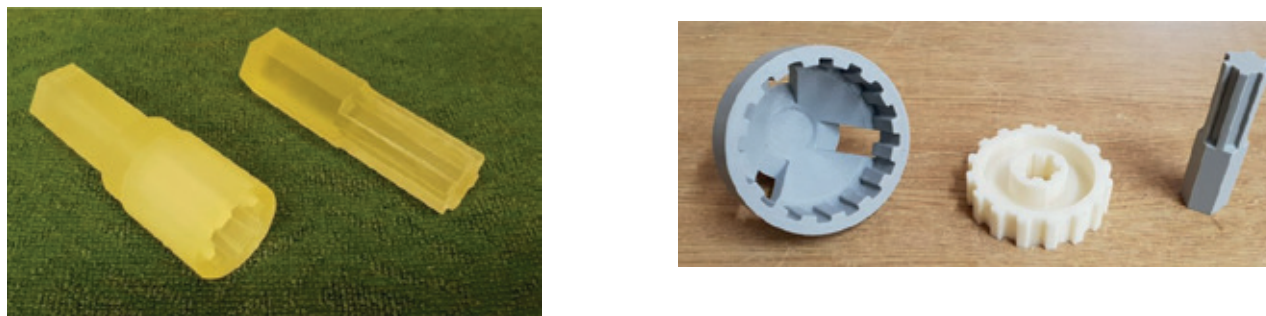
View of the test samples: a) a sleeve clutch element with a splined sleeve and a hexagonal handle, b) a spline connection of a splined shaft with a gear hub
